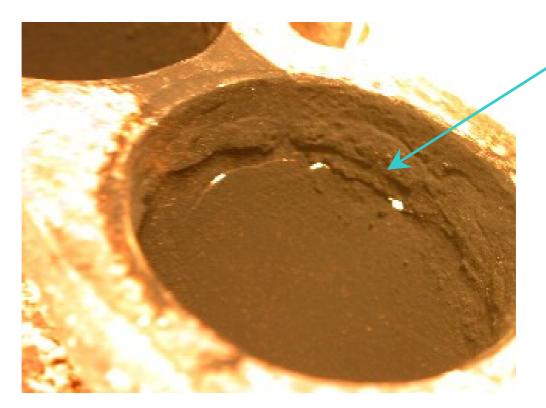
Internal view of extractor pipe at duplex flange showing carbon coating and pipe cracking (arrow).
